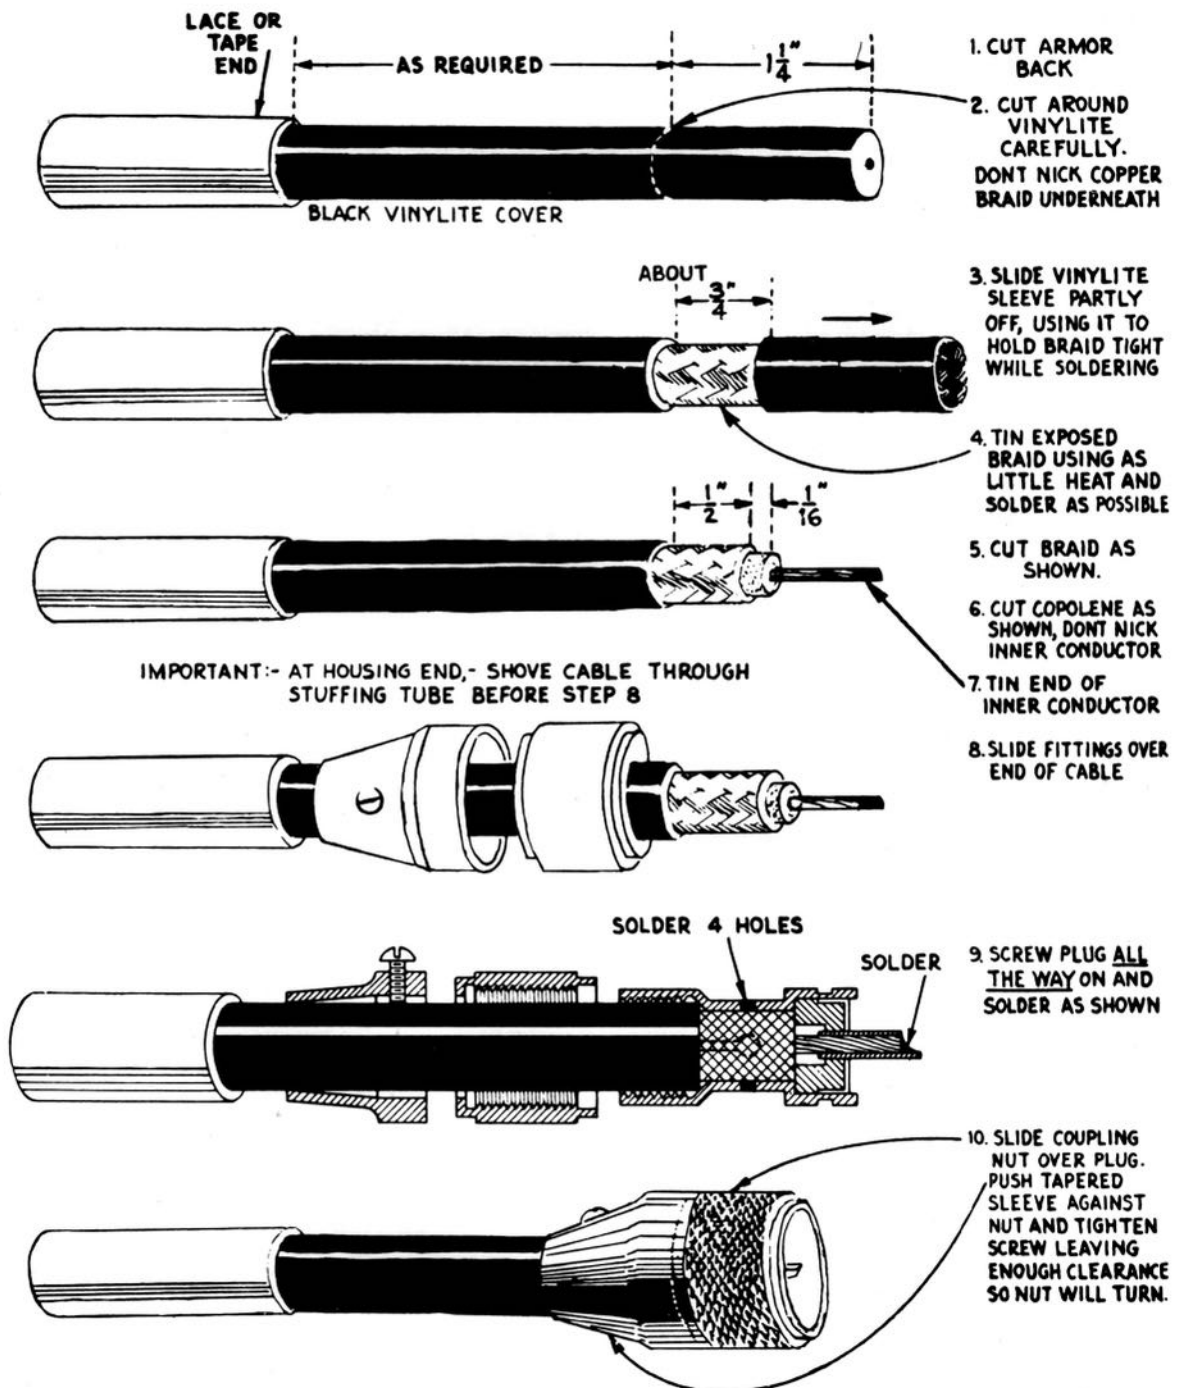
Method of Assembling Plug P403 (Navy Type—49195) to AN Type RG-8/U Coaxial Transmission Line to Form SCAN Output Cable
